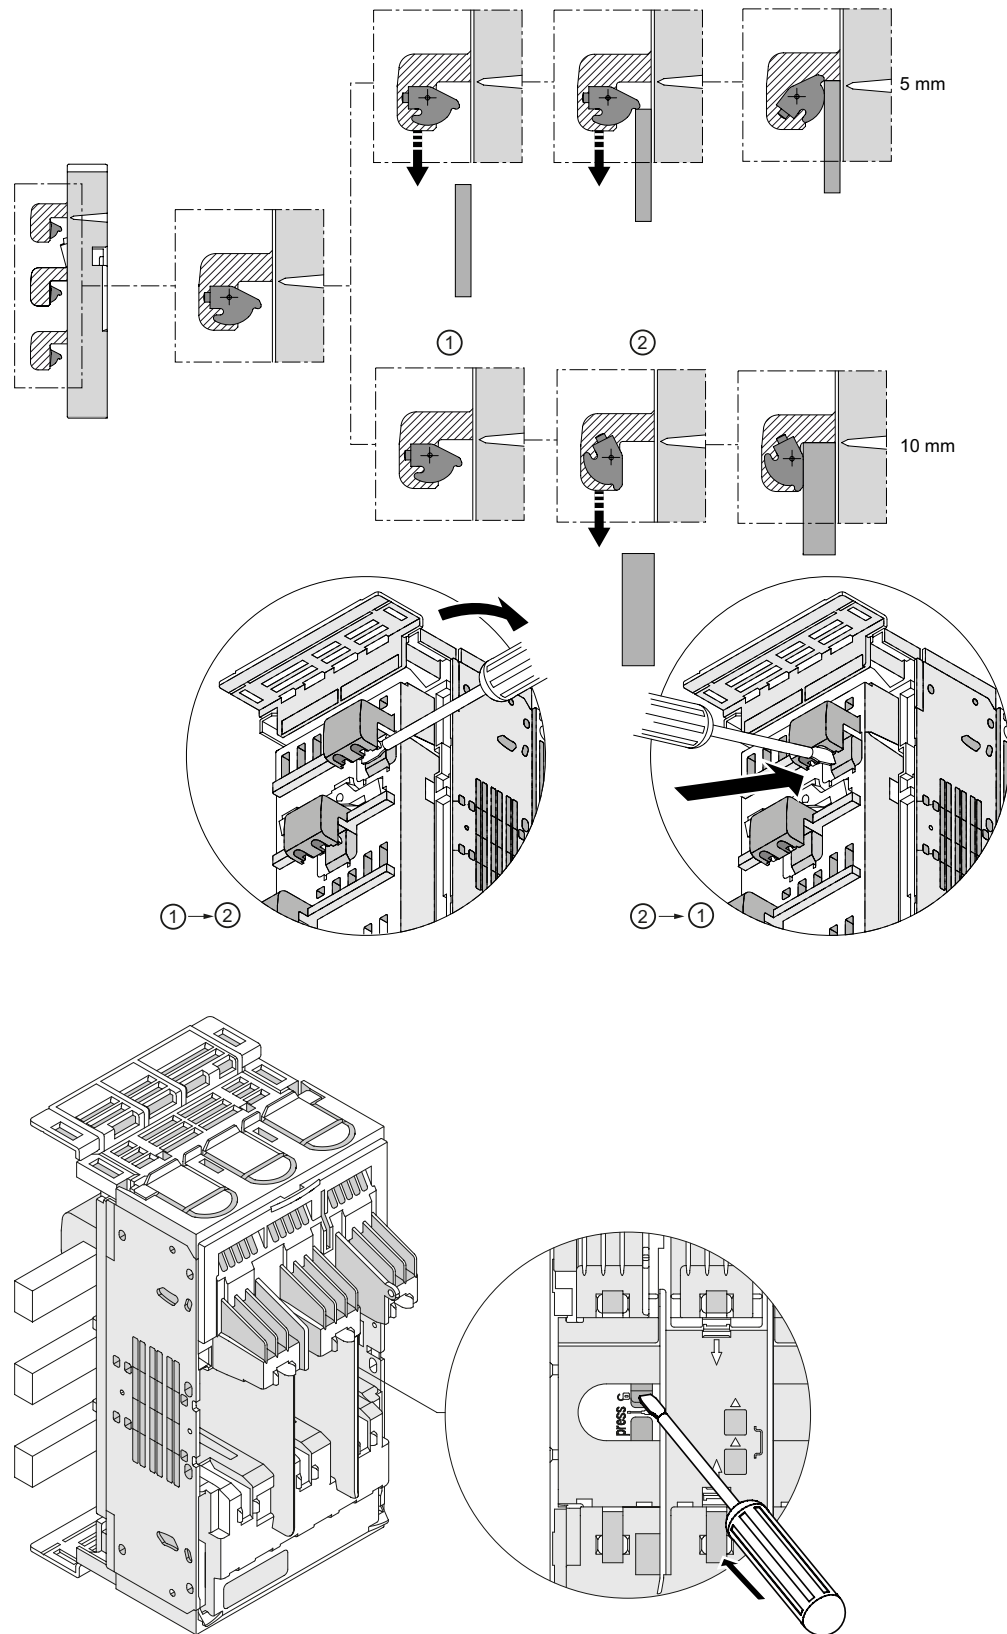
Mounting onto and dismantling from a busbar system, sizes 000 and 00
